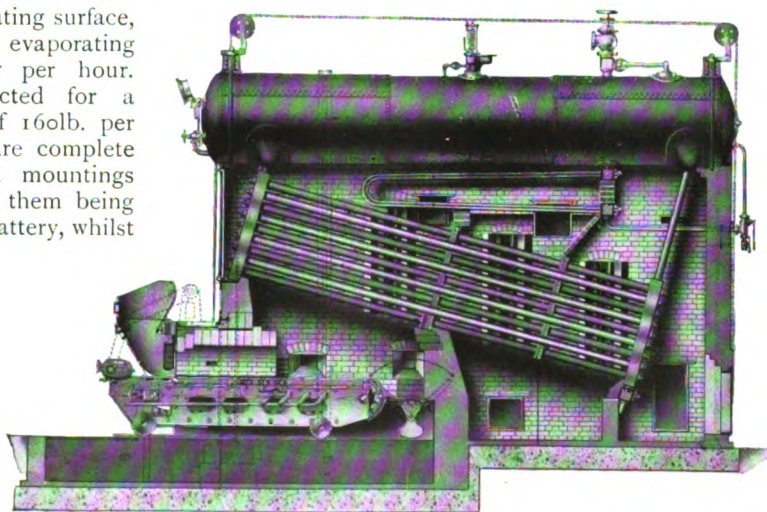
BABCOCK & WILCOX BOILER, WITH INTEGRAL SUPERHEATER AND CHAIN-GRATE STOKER.
